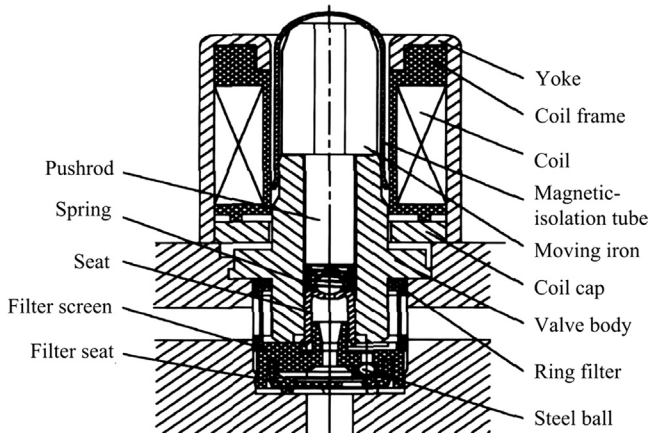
Configuration of the inlet valve in hydraulic braking system.
